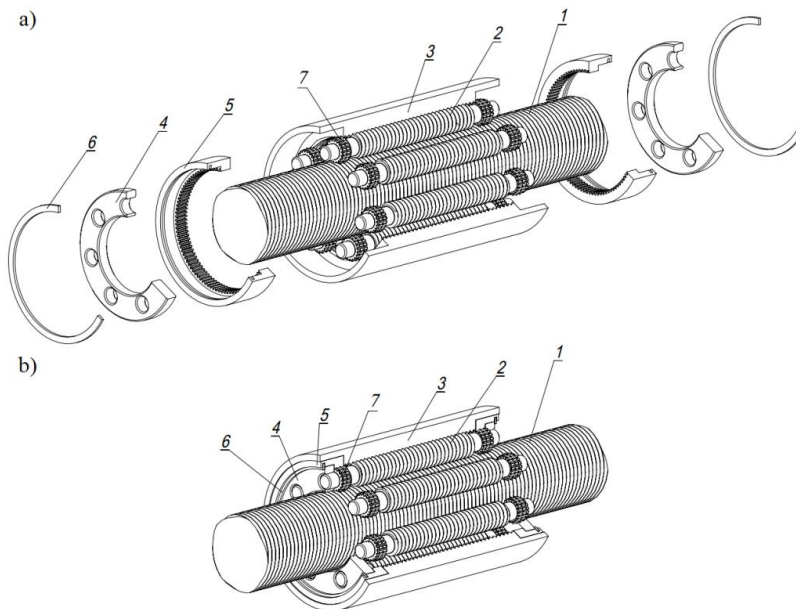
Planetary roller screw; a) The main parts of roller screw, b) assembly view 1 – screw, 2 – roller, 3 – nut, 4 – end plate, 5 – ring gear, 6 – retaining ring, 7 – planetary gear
